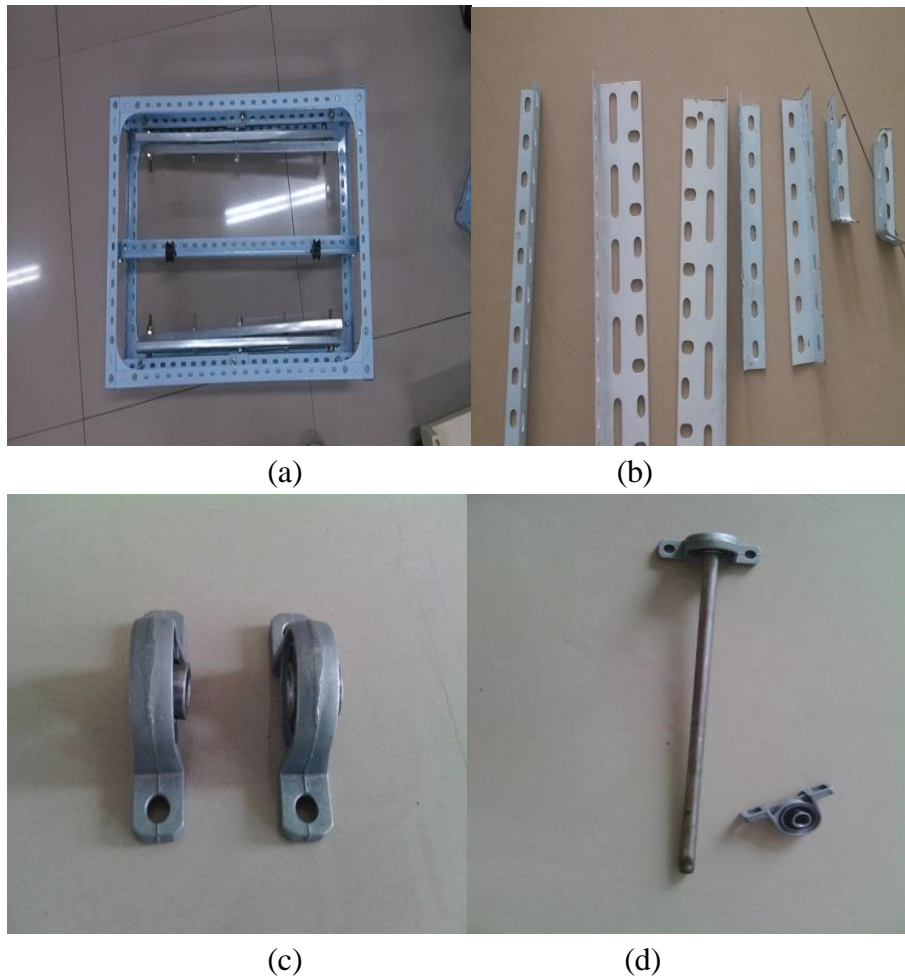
(a)The framework; (b) material; (c) bearing; (d) shaft
